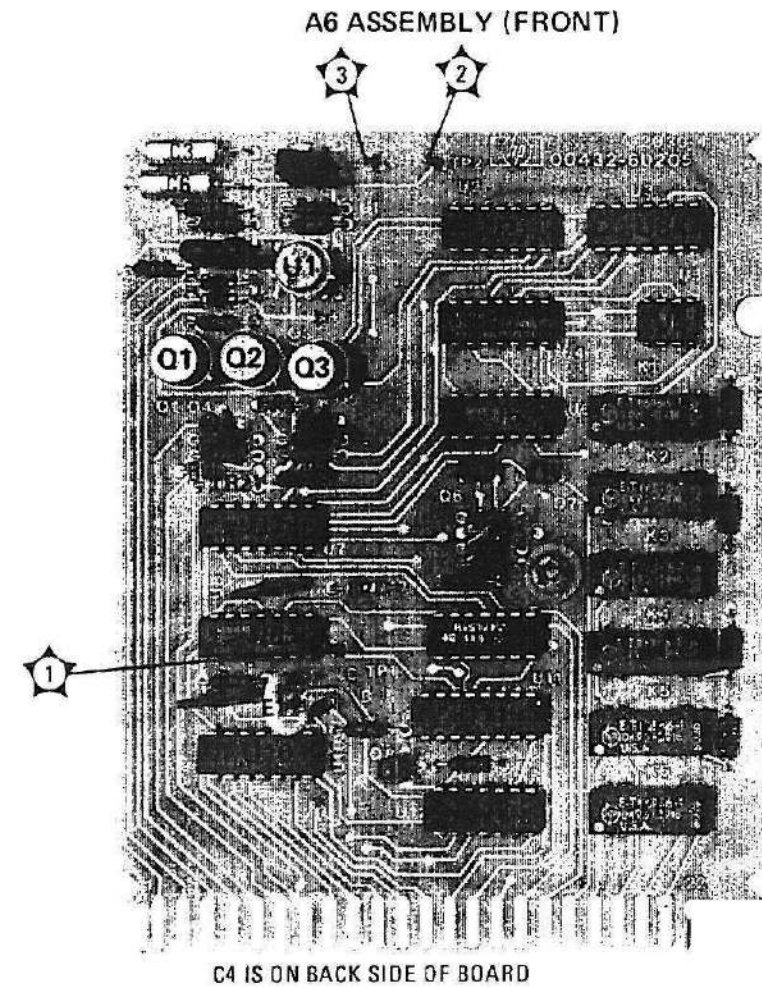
Auto Range Assembly A6 Component Locations (P/O Change N)
